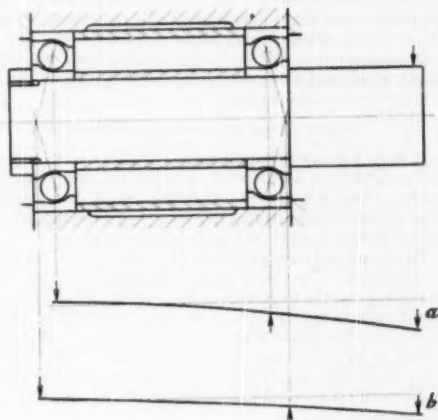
DEFLECTION OF SHAFT AND BEARINGS; CANTILEVER LOADING
